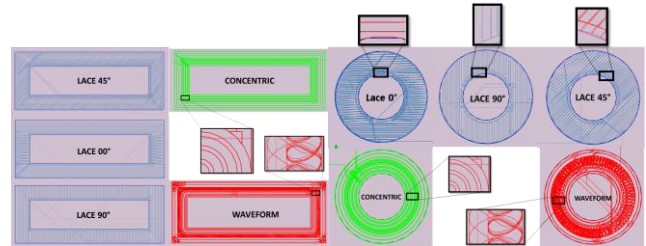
Machining strategies experimentally tested: (a) toolpath strategies on linear geometries; (b) toolpath strategies on circular geometries
